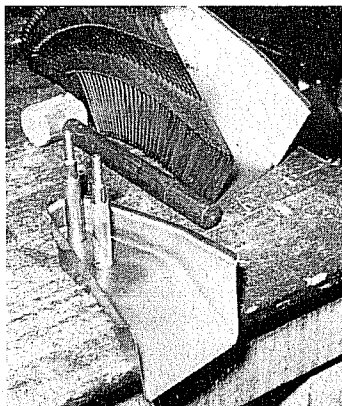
and 16a.—Method of assembling rear engine-mounting bracket
